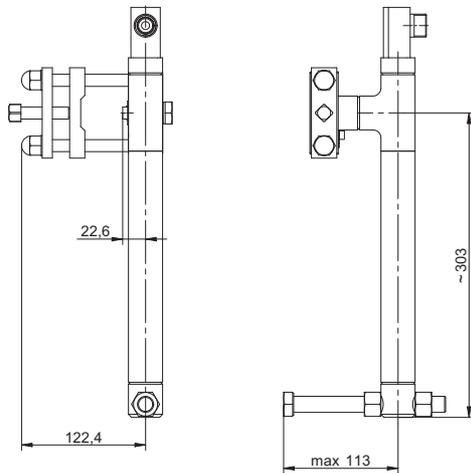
Device for barrel assembly with YOKE connection suitable for 90° barrel valves (outlet to the right or to the left)
